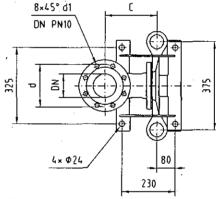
DN 80 and DN 80/100 guide rail system installation dimensions. The variable dimensions are given in table 5.3
